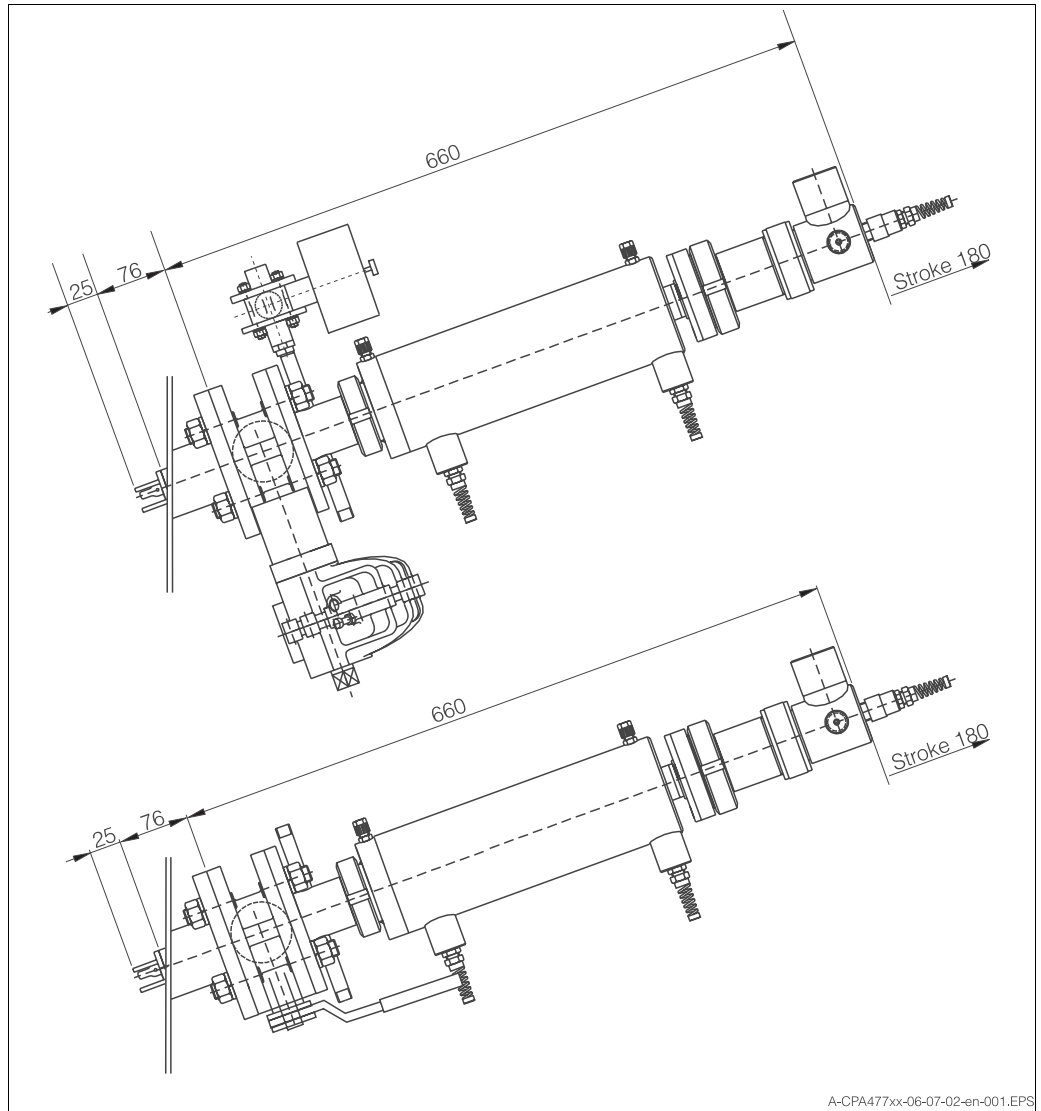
(top): CPA 477 with pneumatic ball valve drive in measuring position
